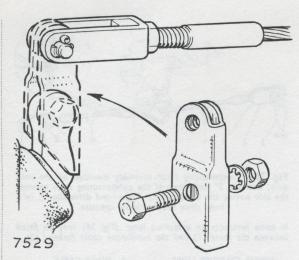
The lever extension fitted between the wheel cylinder lever and the handbrake cable forkend; note the position of the "fold" in the lever extension relative to the wheel cylinder lever.
